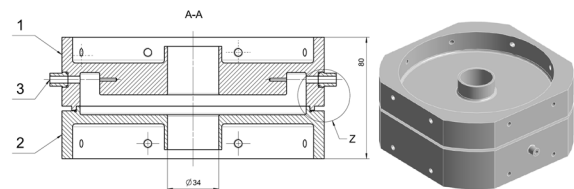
Technical drawing and 3D-model of the modified DCM, courtesy by M. Pelzer DESY, MDI.
